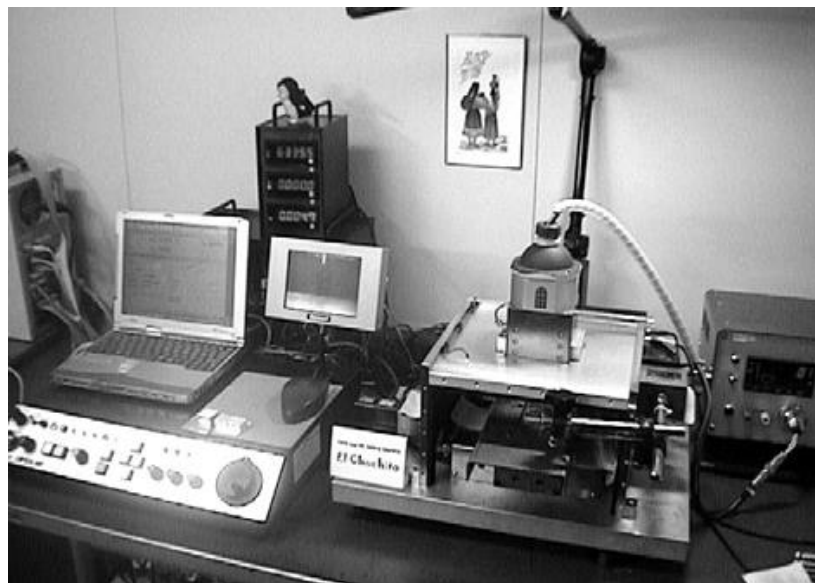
“El Chuchito” Desk-Top NC Milling machine (Okazaki et al., 2001).
